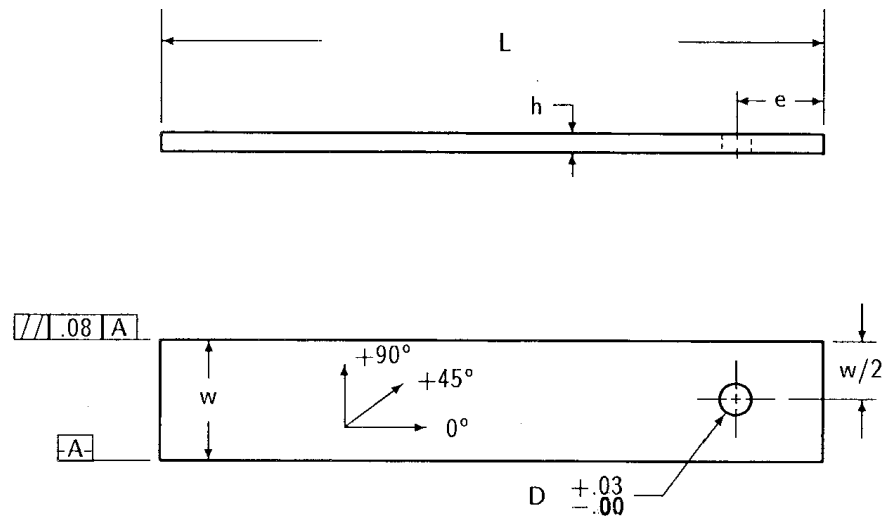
Double-shear specimen geometrical definition. - Reproduced from [244]
